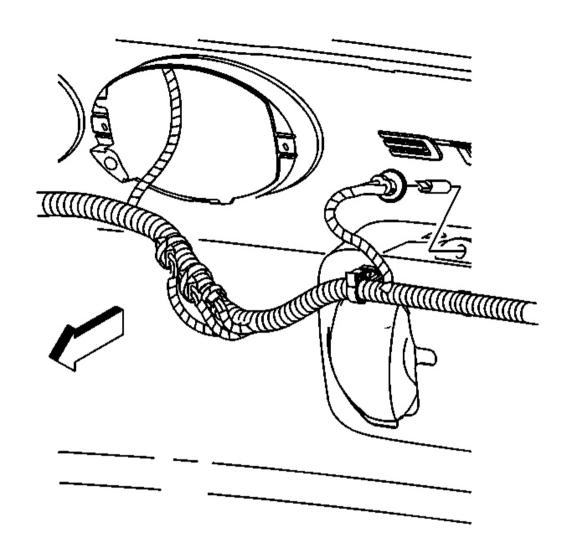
Tail Lamp Opening At License Lamp Assembly & Sockets Courtesy of GENERAL MOTORS CORP.
